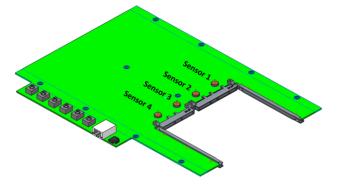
</u>116: LFF Card Thermal Test Fixture Design – Cover Removed
